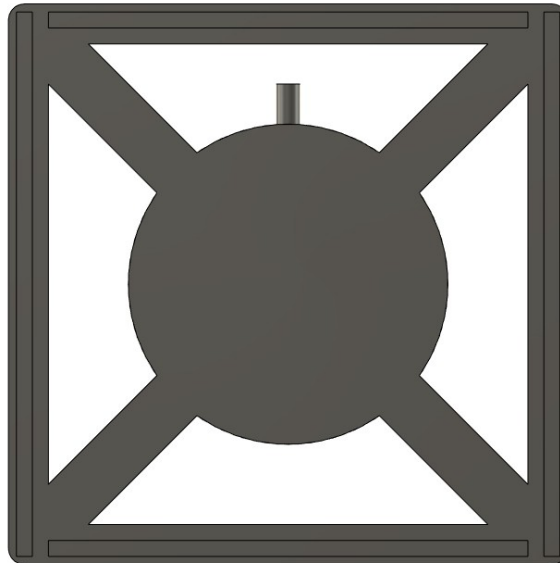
Bottom view of final product includes adhesive material to allow for multi-faced deployment
